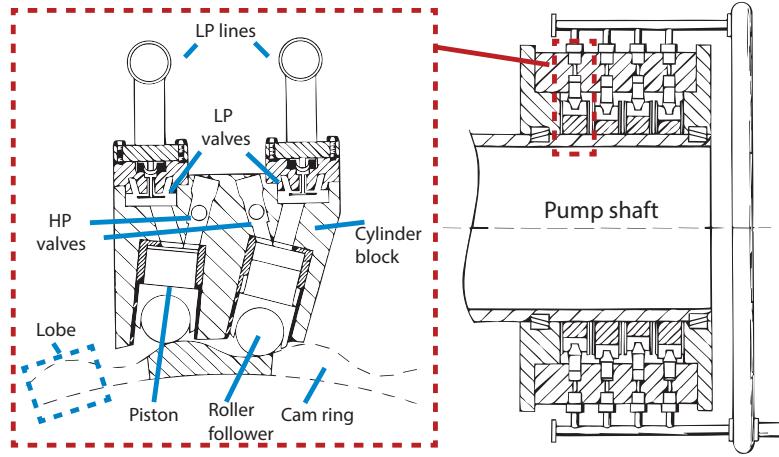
Side cross sectional view with zoom of one cylinder block with a cam ring, two cylinder chamber volumes and the connected valves [Kameda et al., 2014] (modified).
